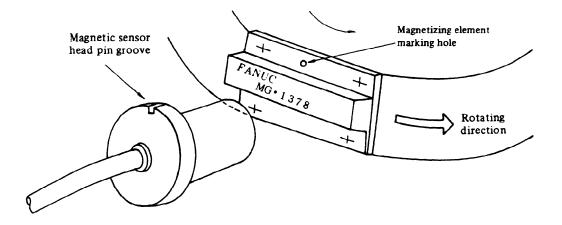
(d) Magnetic sensors mounting example (4) (Q, R, S, T)
